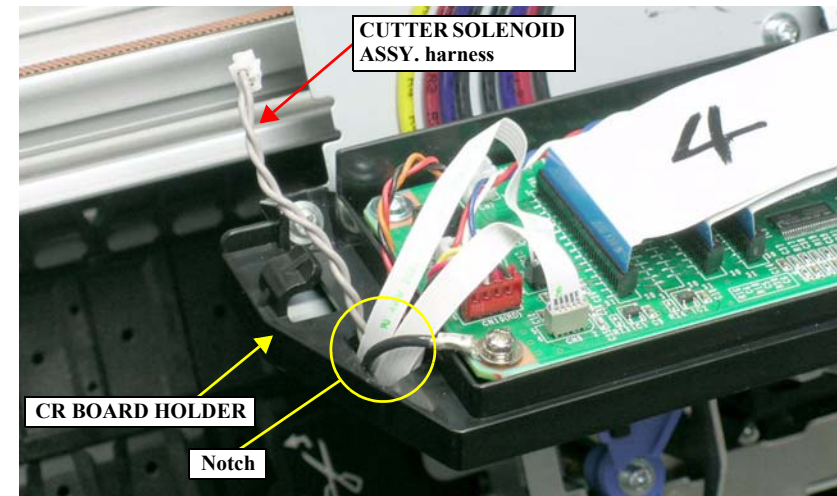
Pulling Out the CUTTER SOLENOID ASSY. Harness
